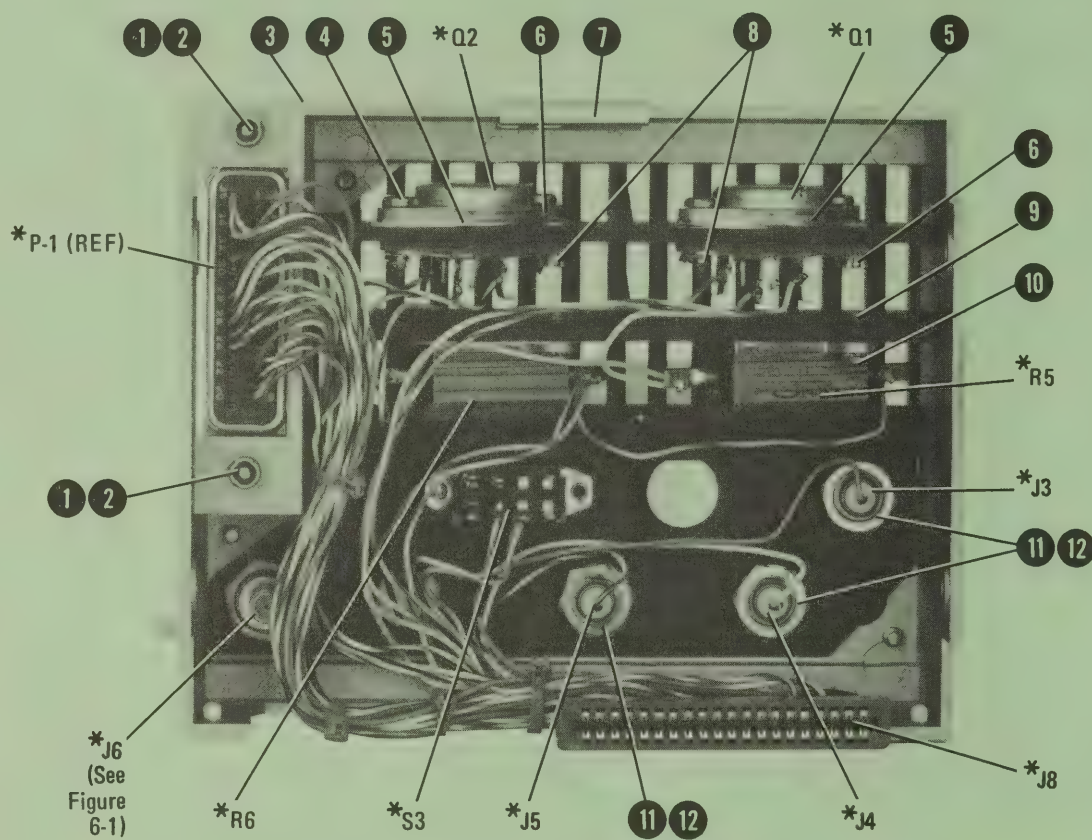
Rear Panel Parts Identification (CHANGE F)
